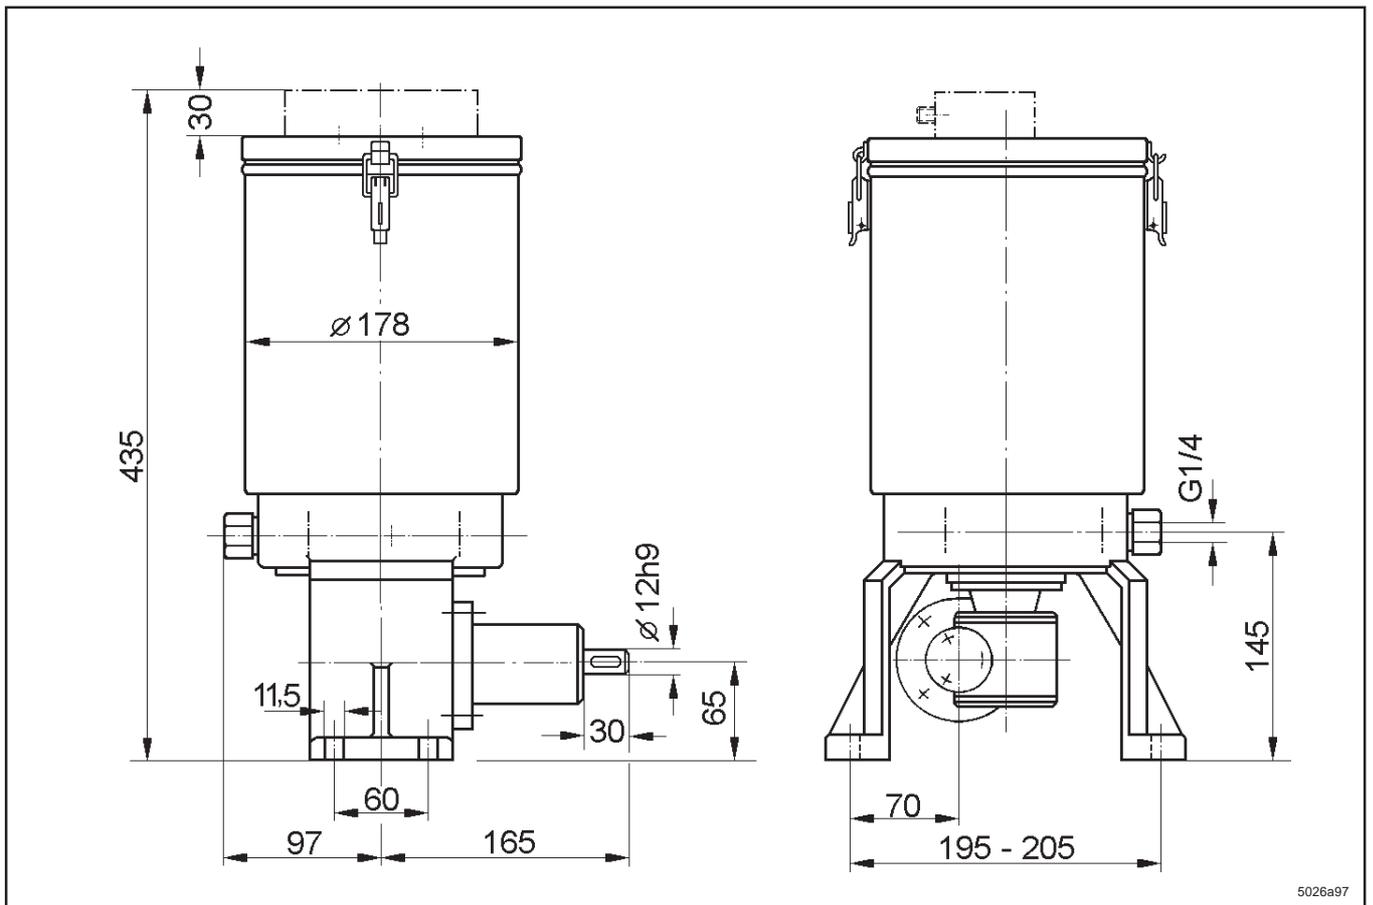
Dimensioned drawing of pump P 205, single-stage gear, 5 l sheet metal reservoir, free shaft end
